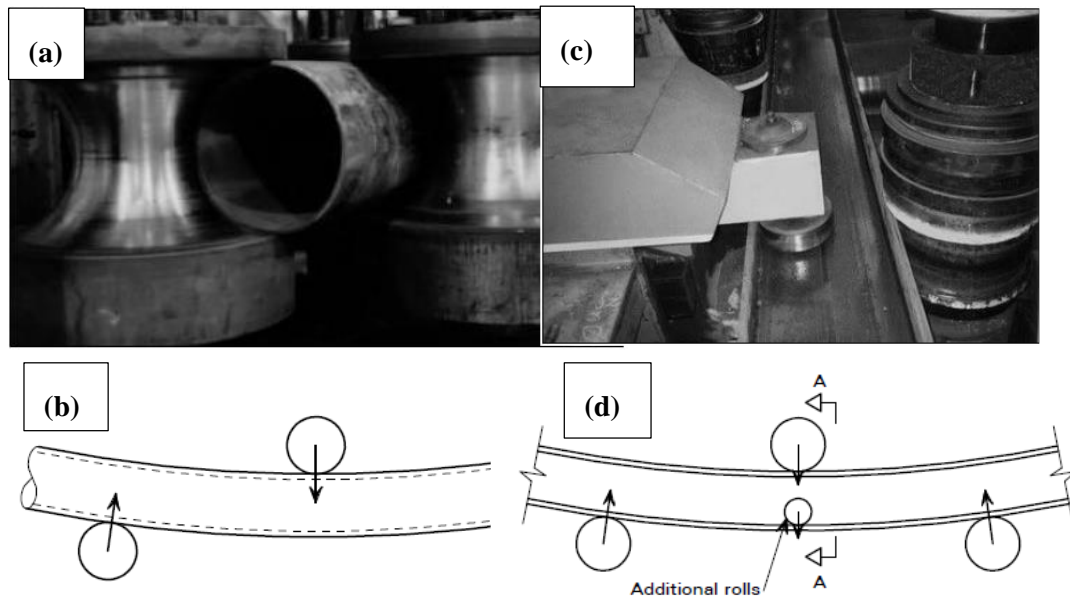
(a) Roller bending of a tubular section; (b) roller arrangement for a tubular section; (c) bending of an I section; and (d) position of additional roller to avoid web buckling
